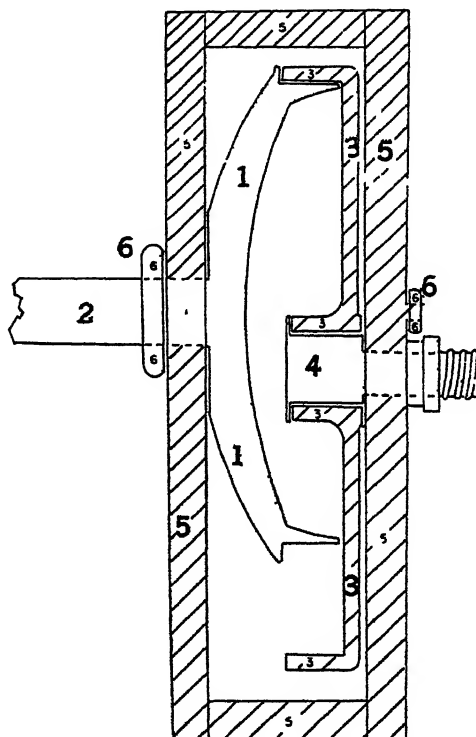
Cross section, top view. 1 Inner crusher wheel integral with driving shaft No. 2. 2 Shaft which supports and drives inner crusher wheel. It is connected by a rigid coupling to the reduction gear. 3. Outer crusher wheel. 4 Stationary, offset shaft which supports outer crusher wheel. Turning this shaft adjusts crushing clearance. 5. Steel frame which supports crusher wheels, and rocks in frame supports No. 6. 6. Supports for frame.
